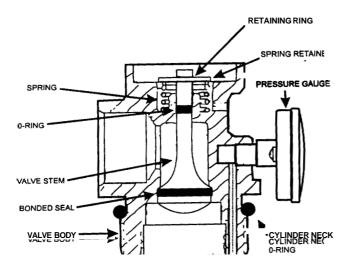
Cylinder Valve Assembly (PIN 87-120009-001)
